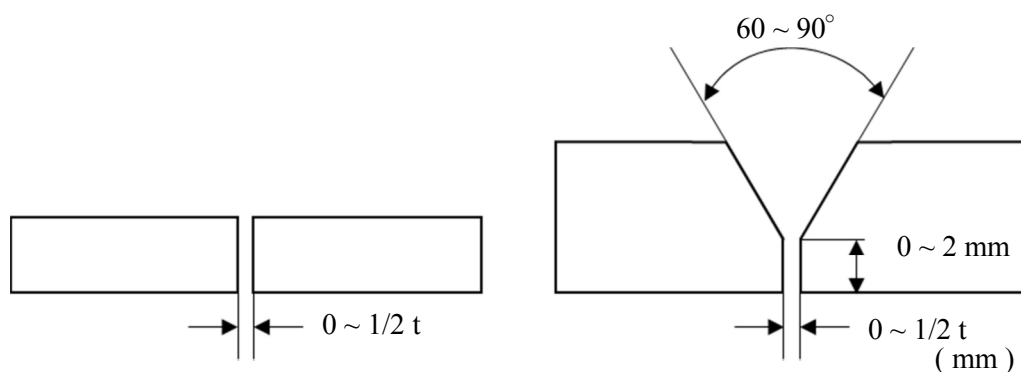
Shape of groove for stainless steel plate welding
